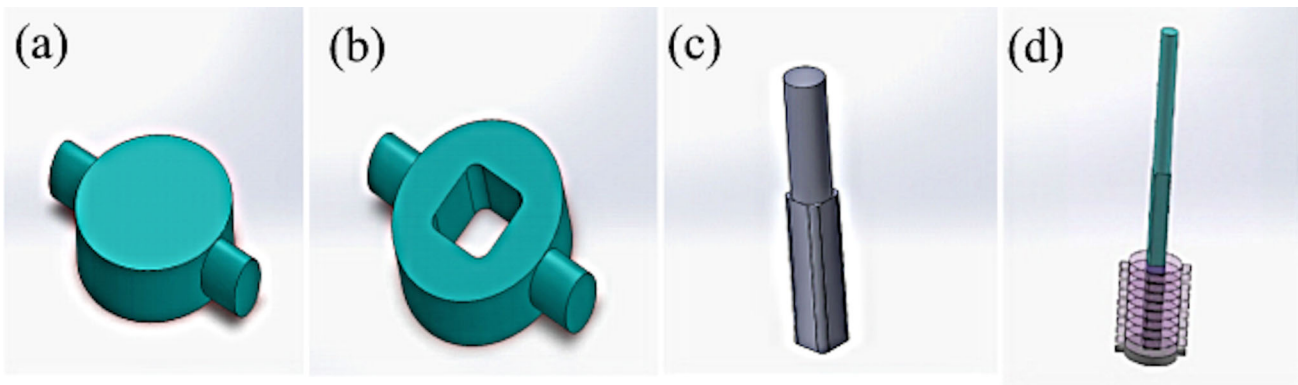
Schematic illustrations of (a) solid disk with cylindrical addendums, (b) hollow disk, (c) punch, and (d) disks assembly.
